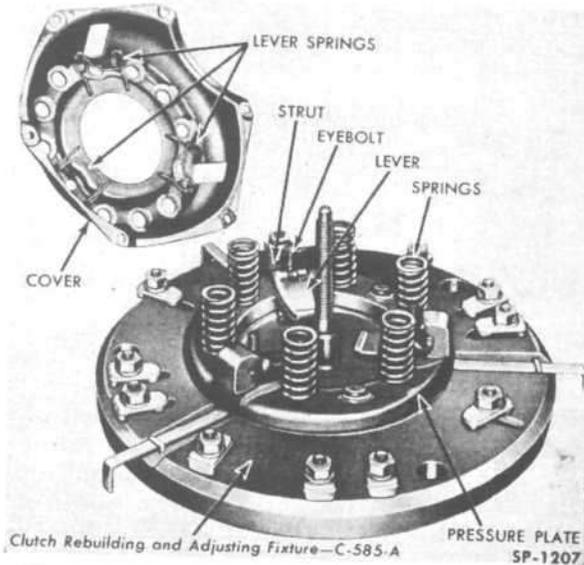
SIX SPRING CLUTCH COVER PLATE REMOVED
